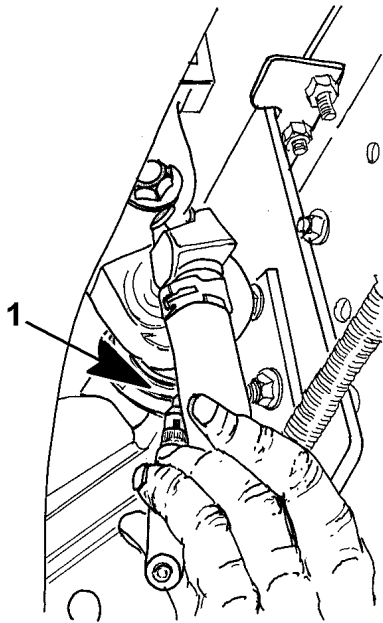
Passenger Side Rear Radiator Hose And Clamp Connection
